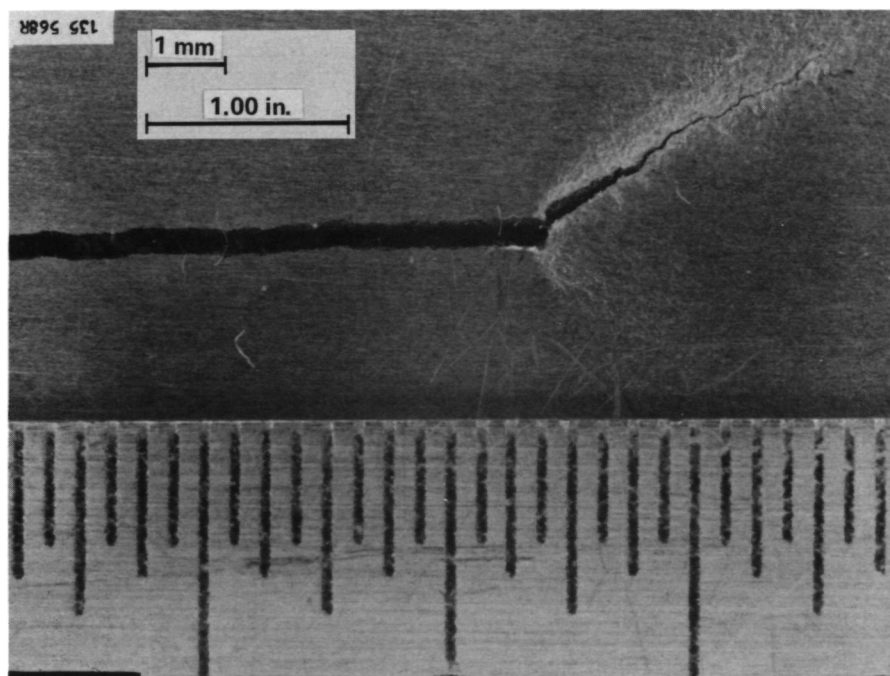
Crack Tip on Top Surface of Disk 21 After Test
